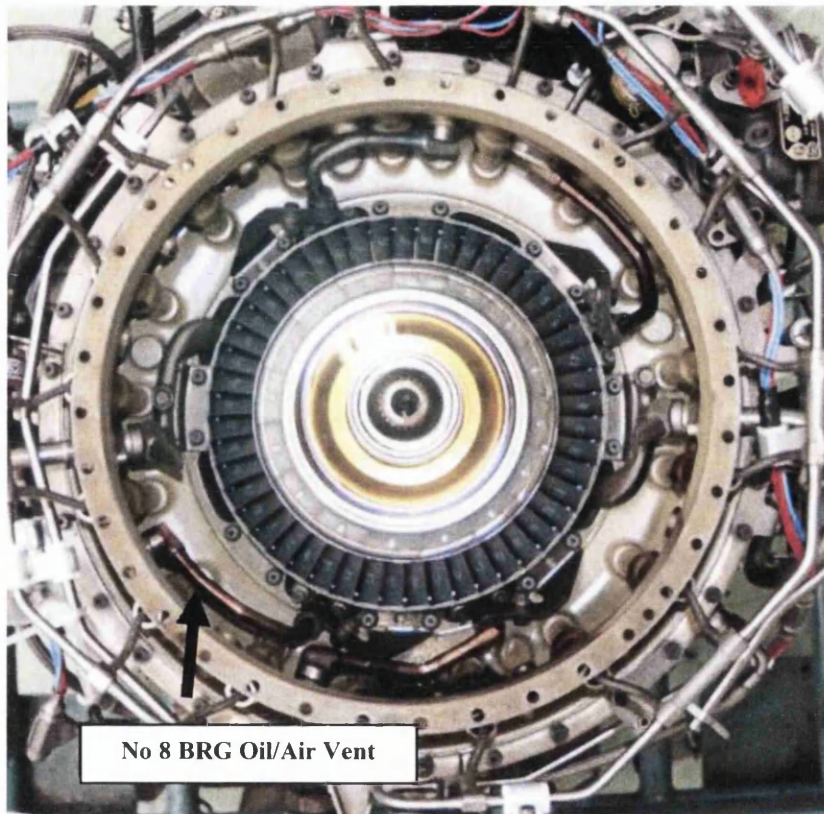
Gem engine from lynx helicopter and the location of the No 8 bearing oil pipe
